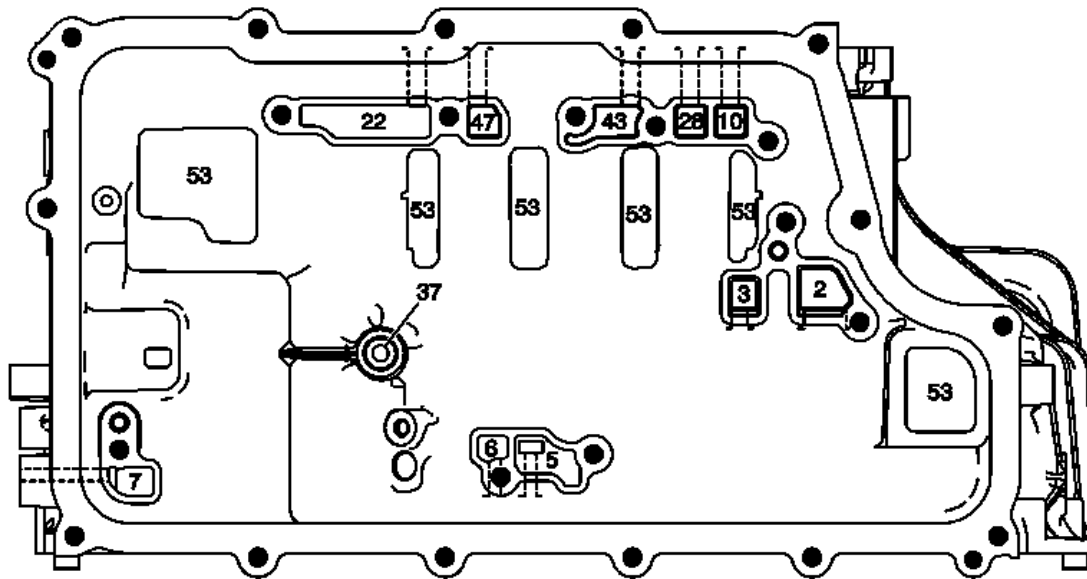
A/Trans Case Assembly-- Control Valve Body Side
